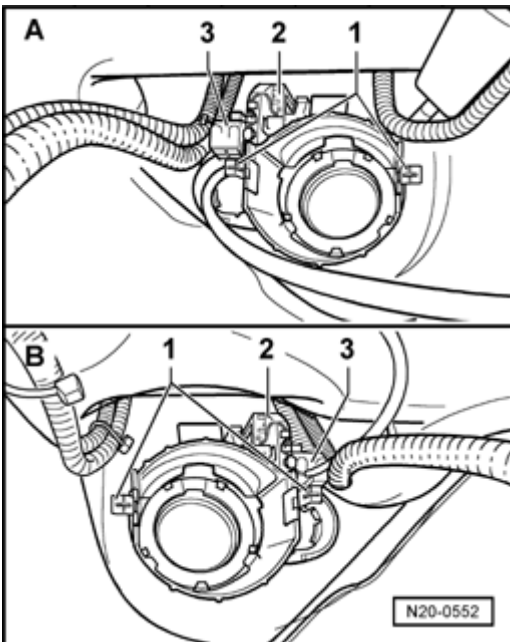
Identifying Suction Jet Pump, Fuel Level Sensor & Retaining Clips
